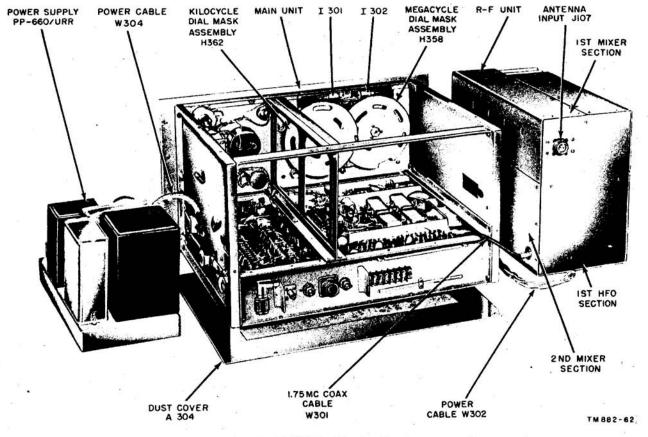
Radio Receiver R-220/URR, with rf unit and power supply removed.
